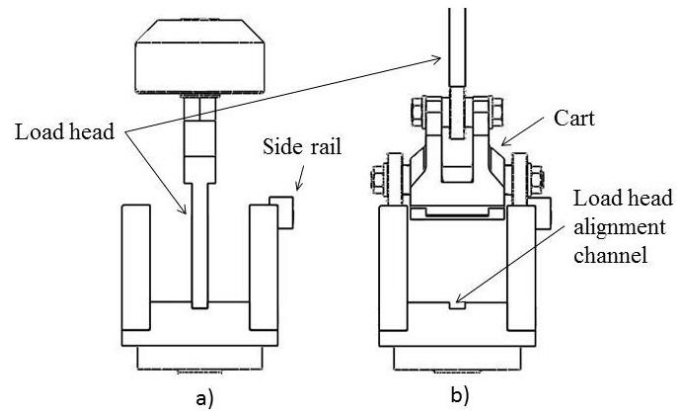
a) Alignment of top and bottom assemblies; b) alignment of carts on tracks
